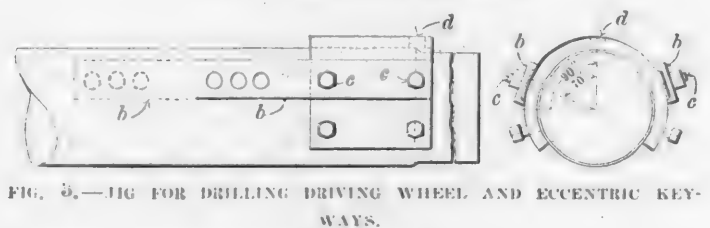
JIG FOR DRILLING DRIVING WHEEL AND ECCENTRIC KEYWAYS.
